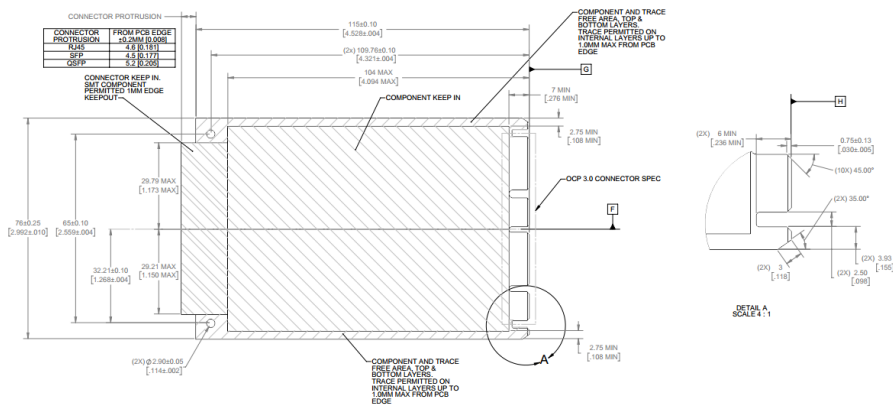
Small Form Factor Keep Out Zone – Bottom View
